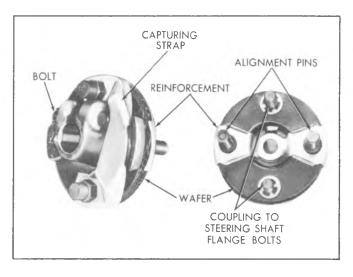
B-45--Flexible Type Steering Coupling-Manual
